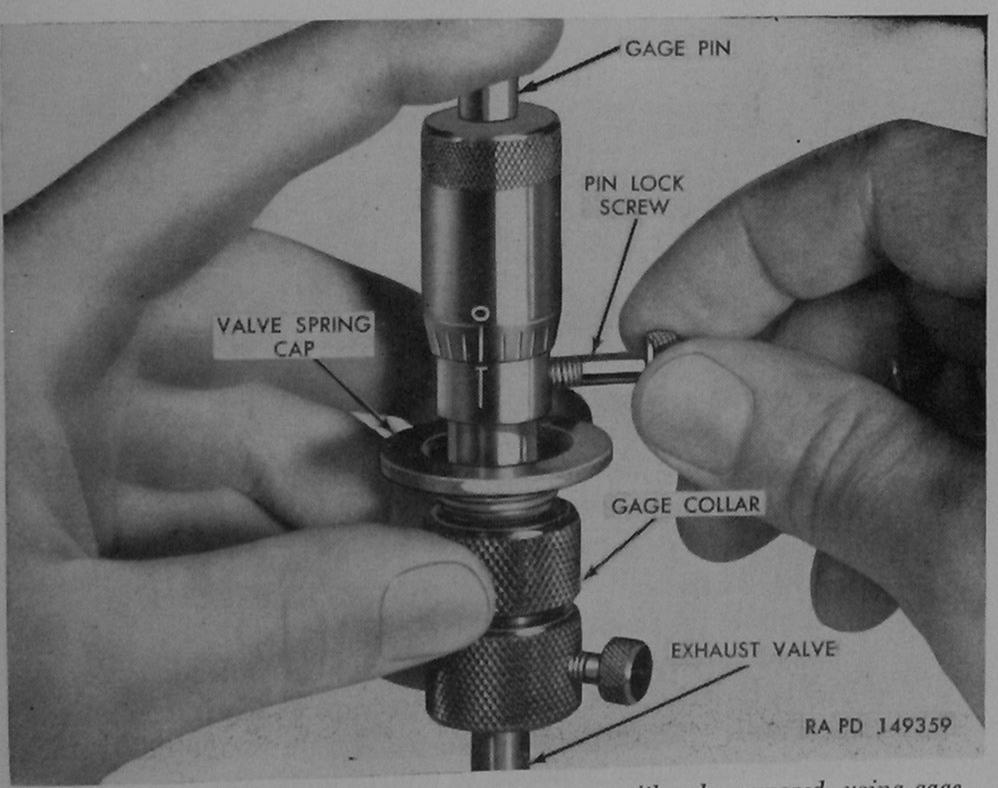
Checking valve rotator cap clearance with valve removed, using gage kit 7950601.
